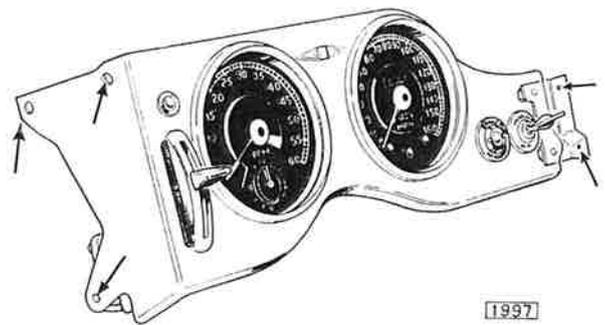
Location of the side facia panel attachment points (Right hand drive).
